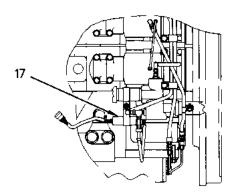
Engine Mounted Sensors Left Side View (17) Starting air pressure sensor.
